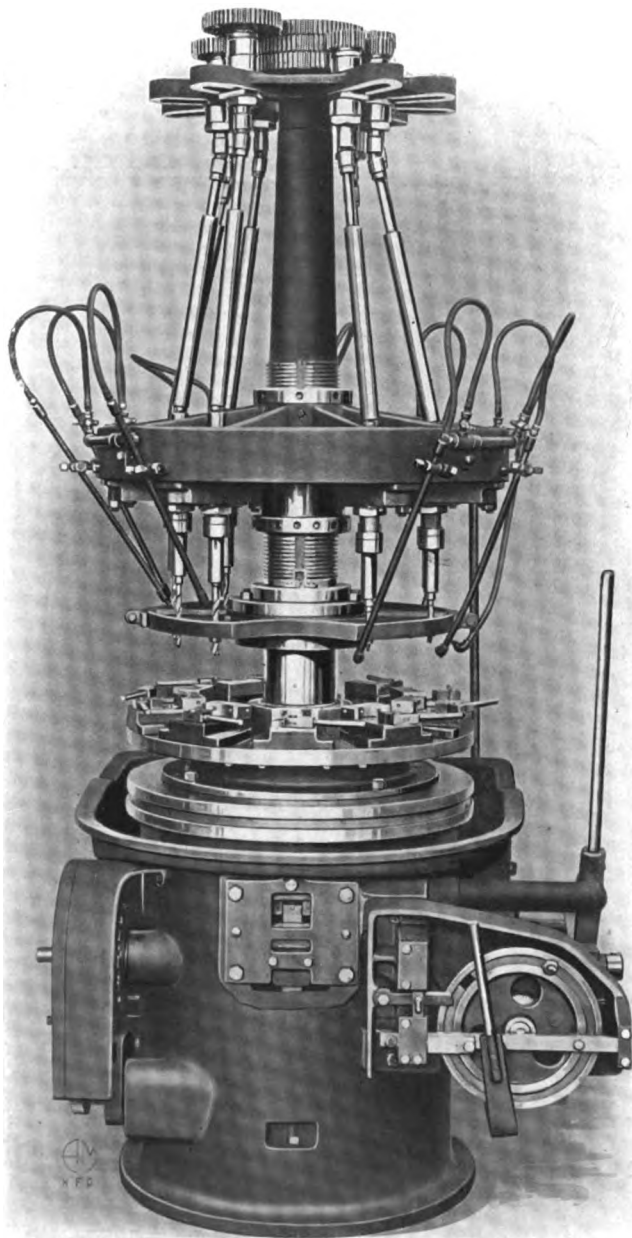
Front View of Cincinnati-Gridley Automatic Multiple Spindle Drill
